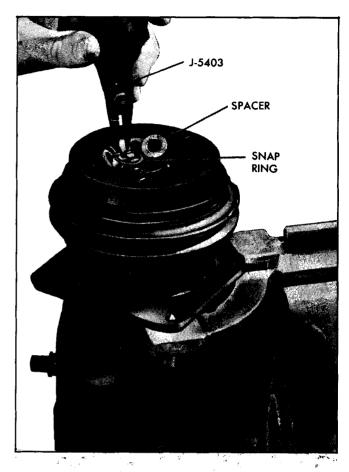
A-62 Removing Hub Retainer Ring and Spacer
